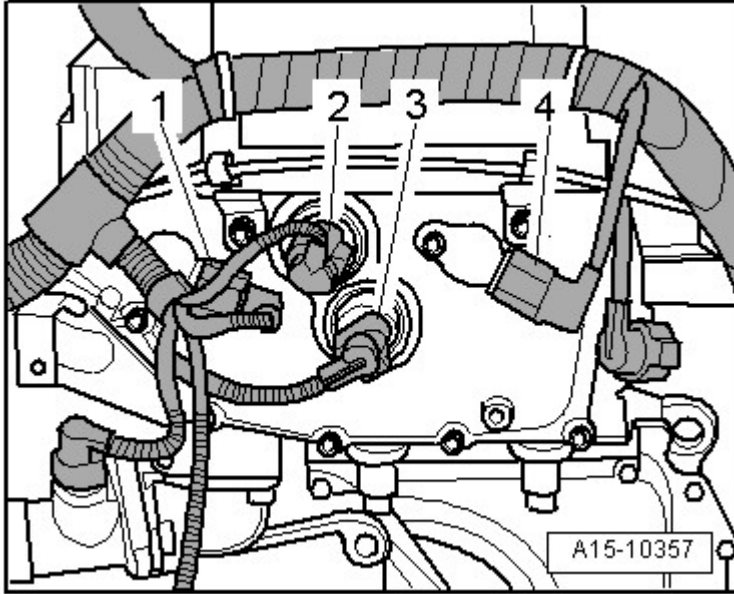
Identifying Camshaft Position Sensors -1 & 4- And Camshaft Adjustment Valves -2 & 3-
